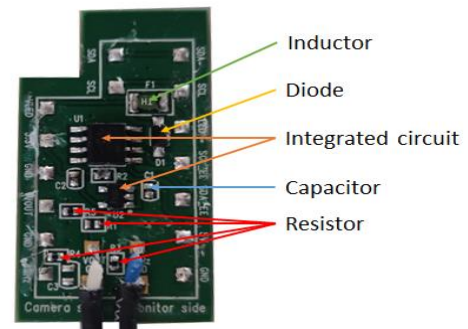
Components of printed circuit board (PCB) of disposable FVS
